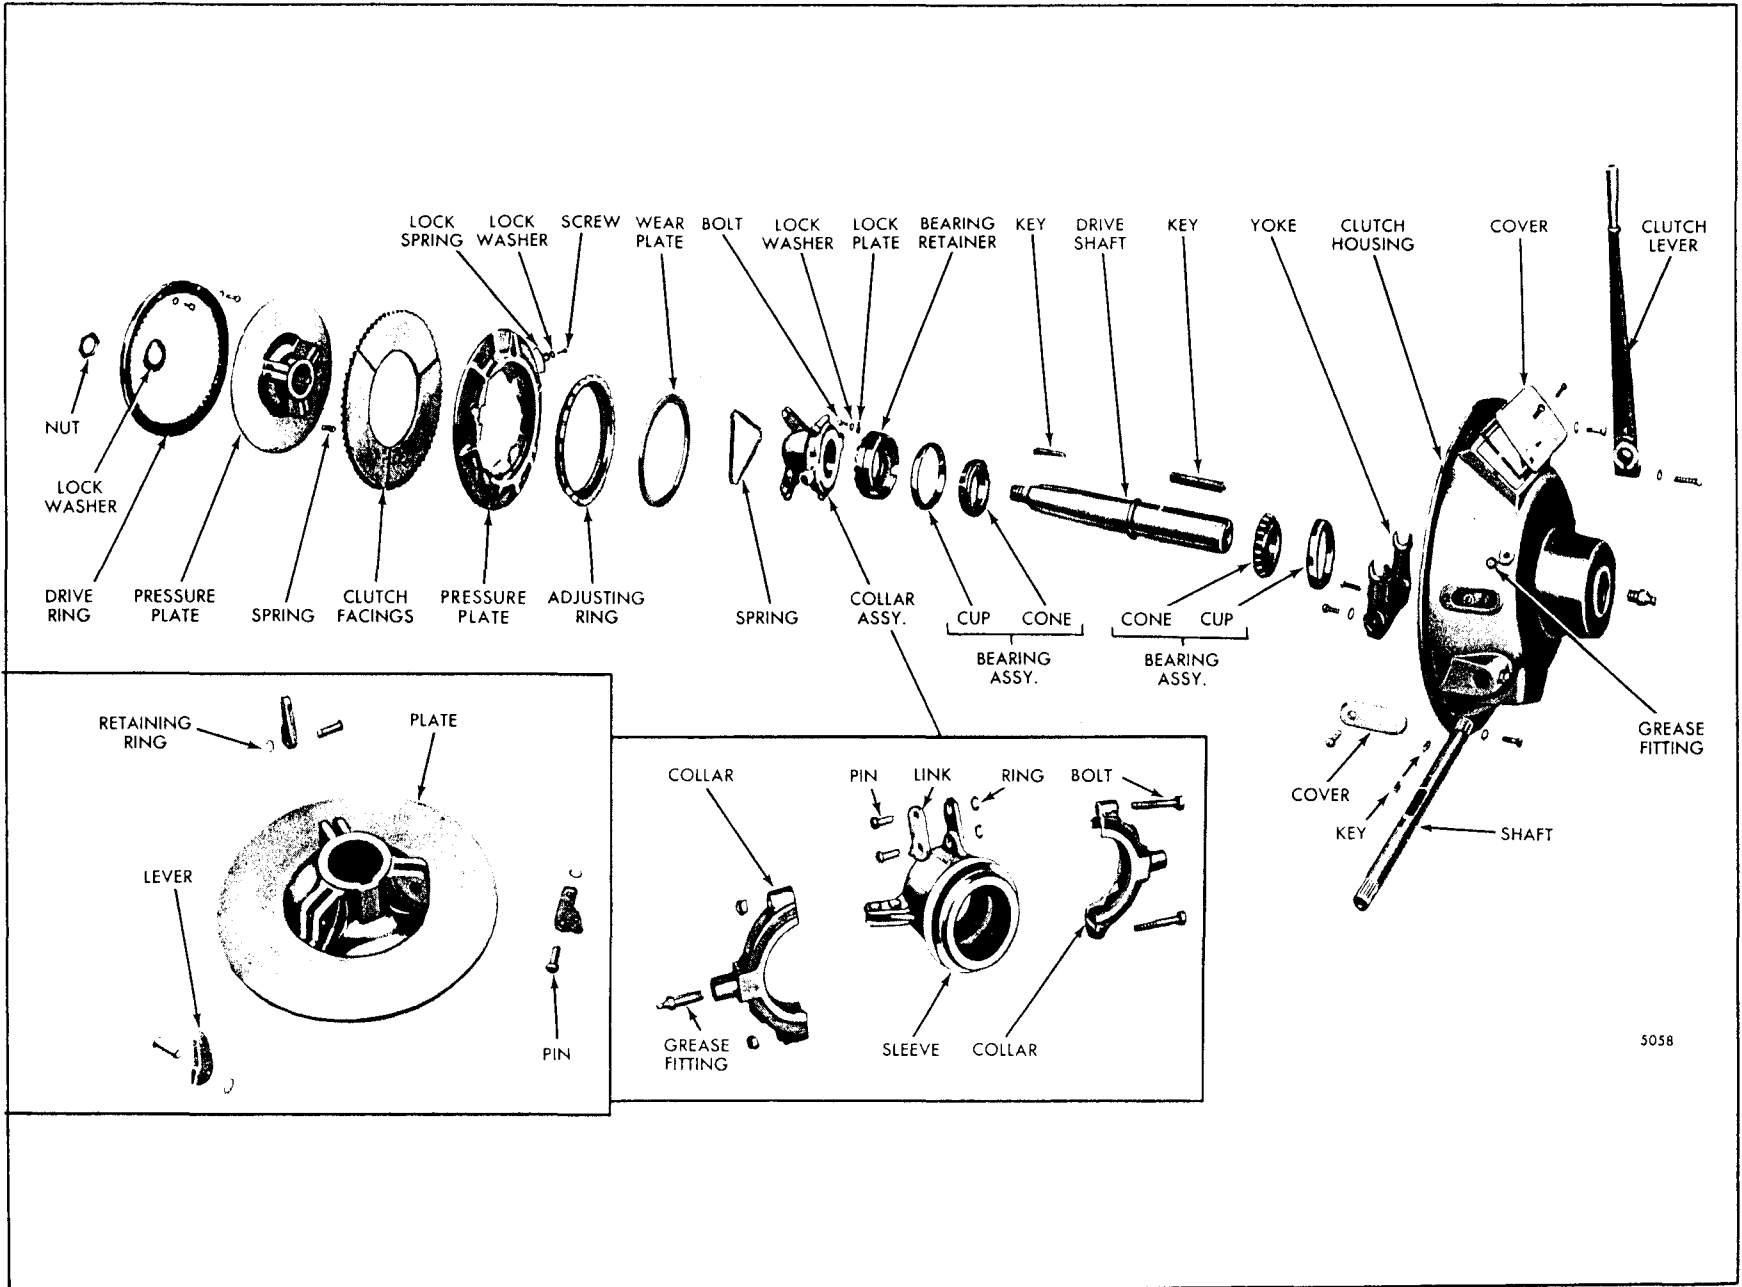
Rear Power Take-Off Details and Relative Location of Parts (10 Inch Diameter Clutch Shown)
